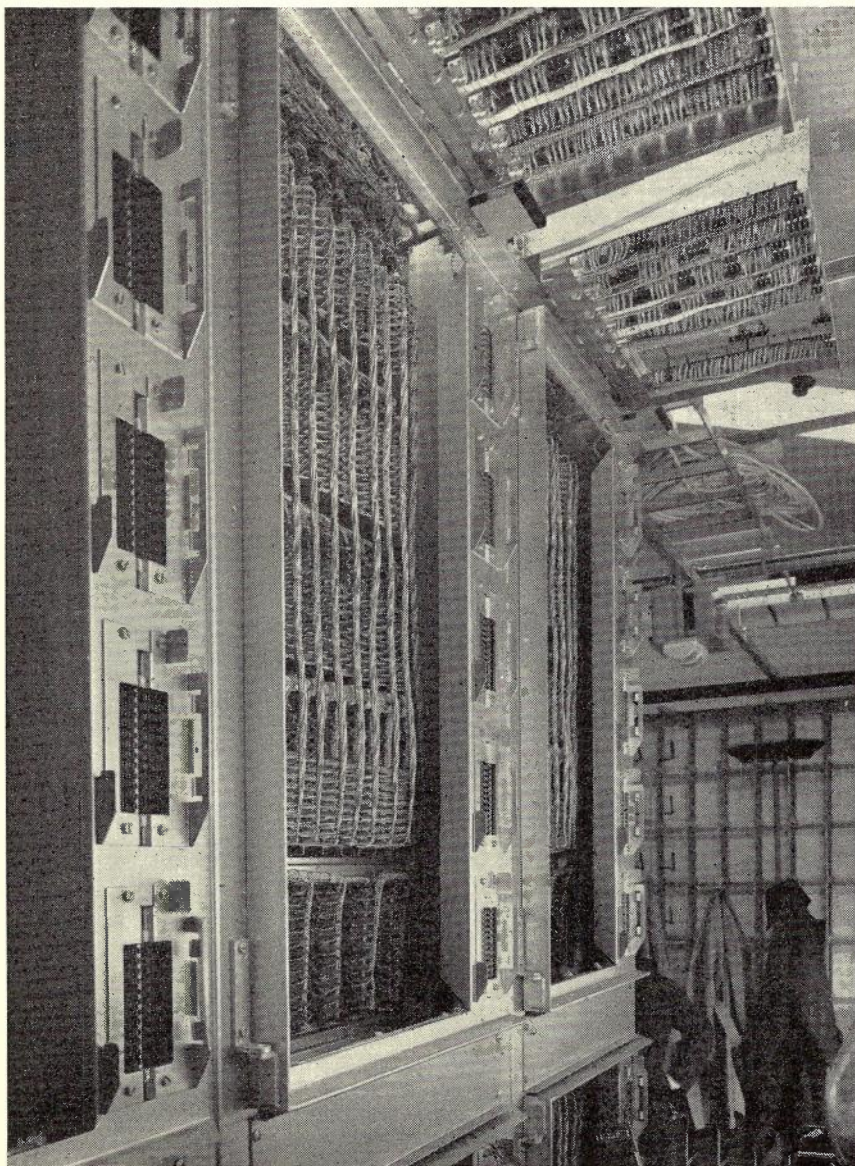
Rear view SLAB jack fields mounted for cabling.
